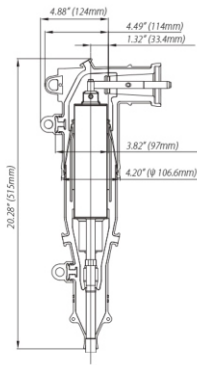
Dimension Info When Hi-Tech Fuse Installed.
